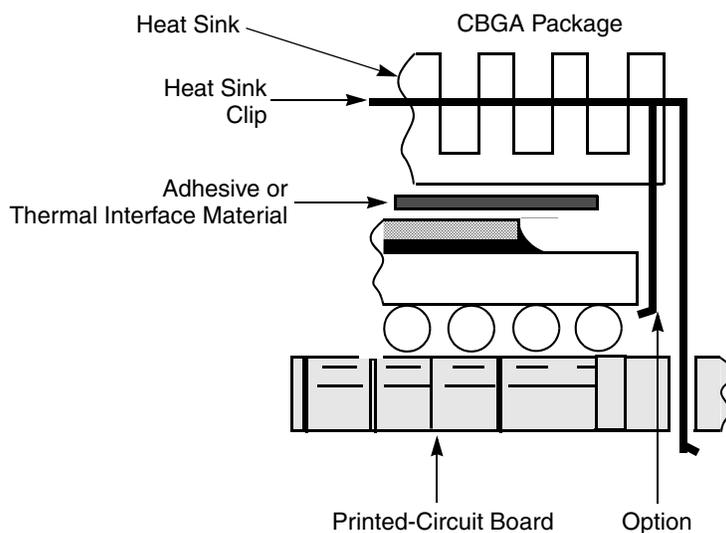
Package Exploded Cross-Sectional View with Several Heat Sink Options
